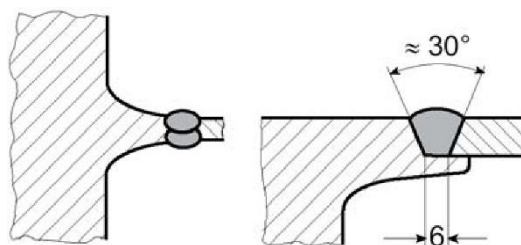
Welding flange on steel castings and forgings
